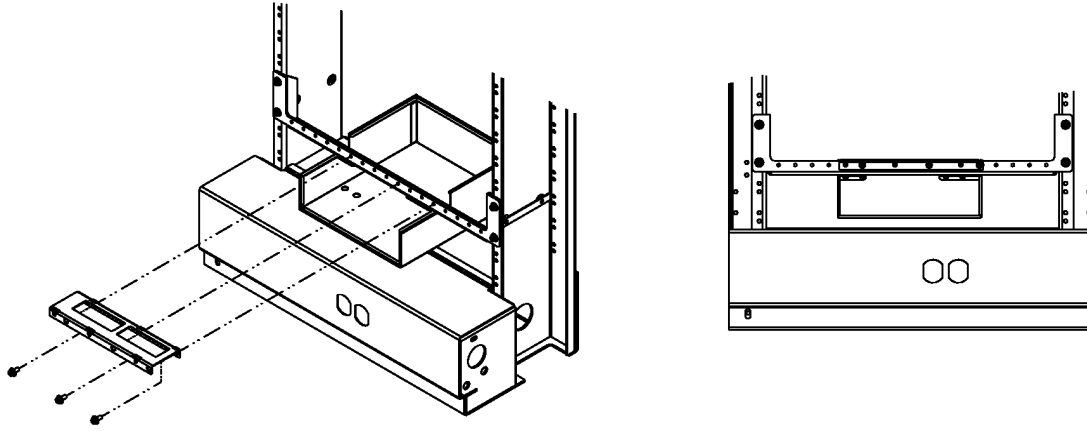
Mounting the 7360 ISAM FX-4 top baffle
